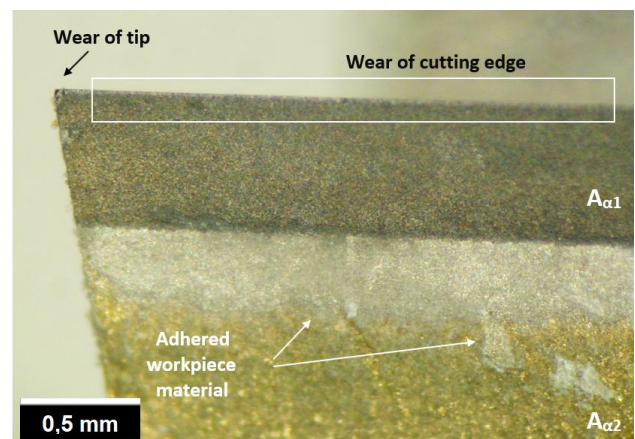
Flank Faces of End Mill OAX WEDM After 112 Minutes of Machining
